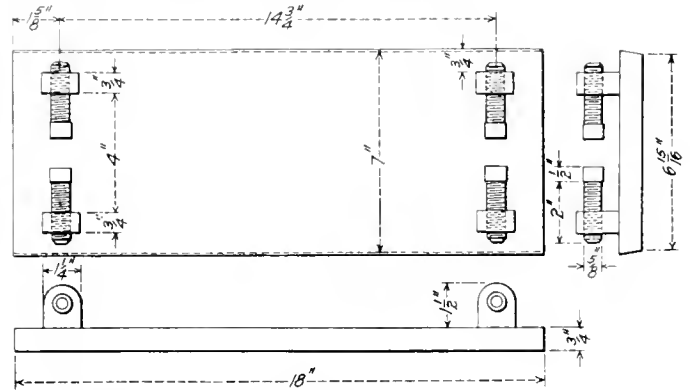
Device for Casting Brass Liners on the Driving Box Shoe and Wedge Faces.
